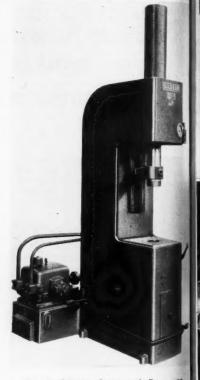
Oilgear Gooseneck Press with Plain Platen
